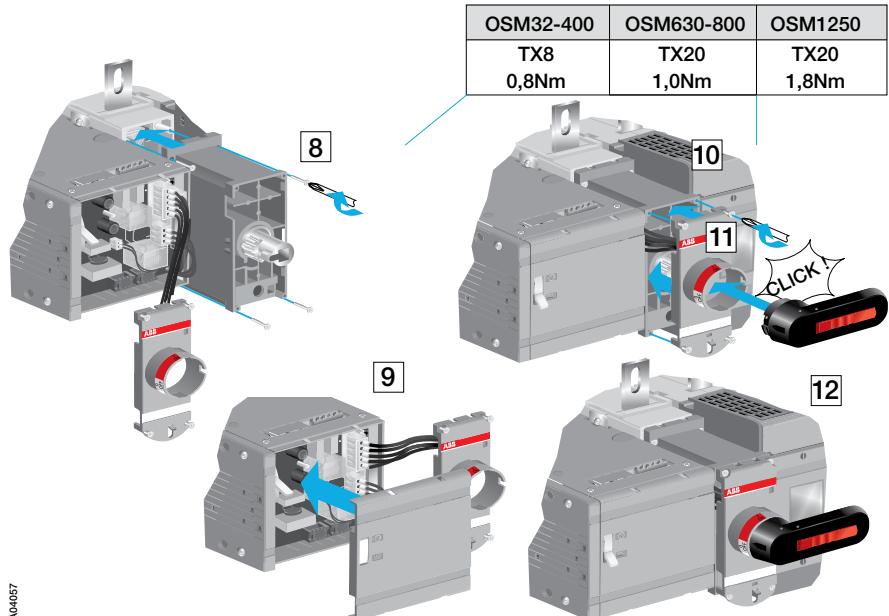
Mounting of the Test auxiliary contacts, type OA_ on the switch mechanism
